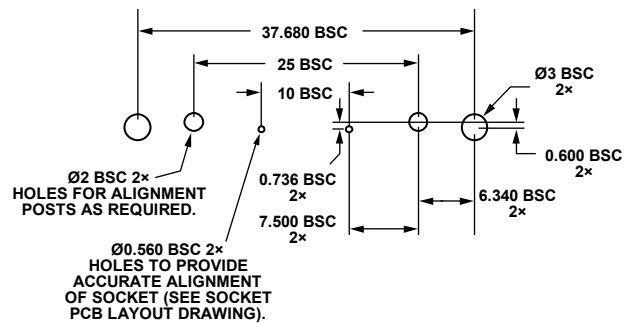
Interface Board Hole Locations for Bulkhead Mount
